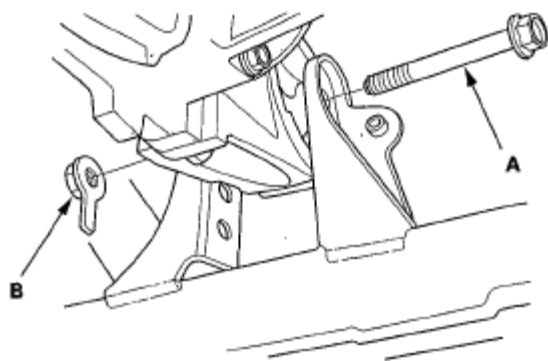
Identifying Front Mount Mounting Bolt And Nut
